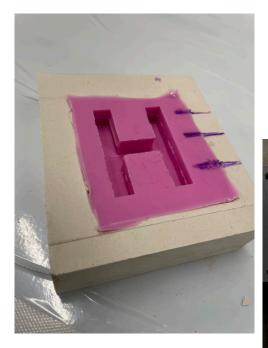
Compression moulding of HDPE using a latex mould Figure 32: Aluminium moulds for melting HDPE Figure 33: Compression moulding of HDPE using aluminium moulds In the experiment, the latex mould (Figure 31) failed to achieve the desired shape: latex prevents heat from going inside the mould and therefore the HDPE cannot form into the mould's shape. This result forced me to consider a more solid moulding material, such as timber or aluminium.
